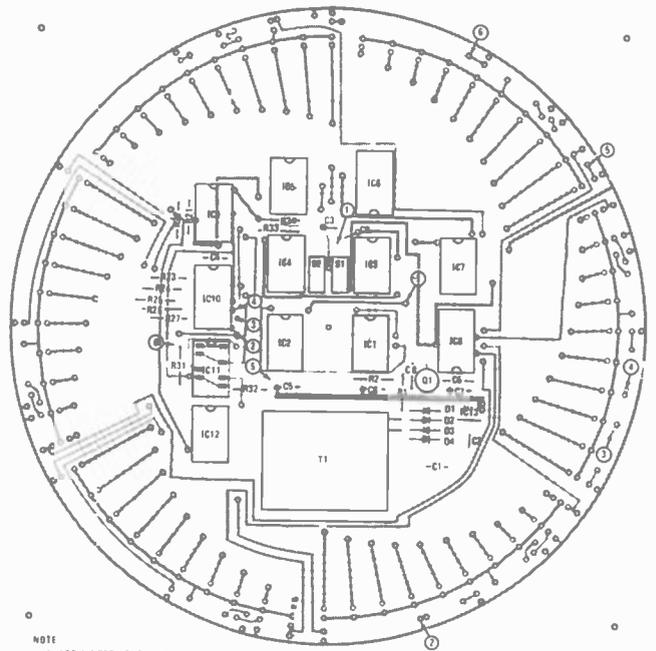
COMPONENT PLACEMENT for rear of PC board.
